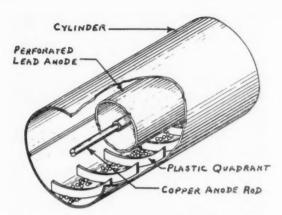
Schematic sketch showing construction of plating cylinder and anode.
